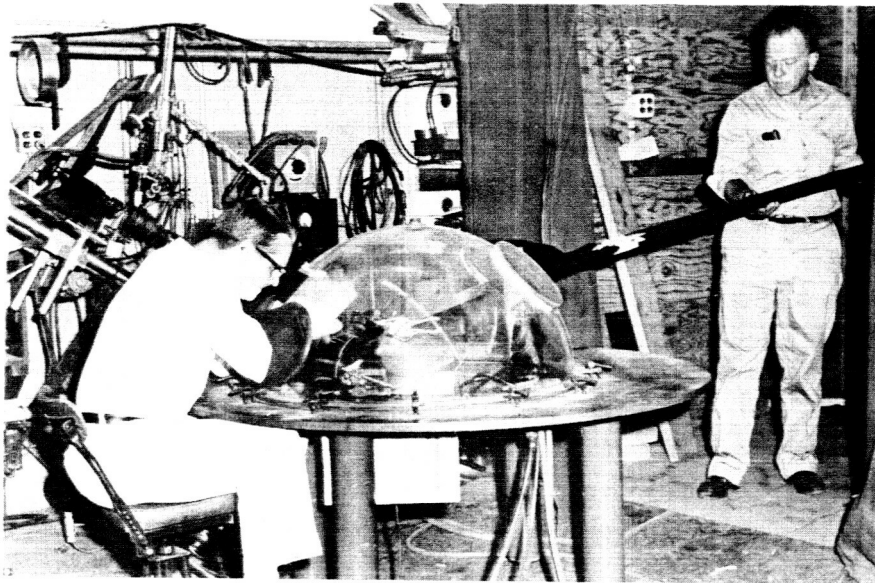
ADAPTATION OF A SMALL CHAMBER TO PROVIDE LOCALIZED SHIELDING OF A LARGE PART DURING WELDING (REF. 20)
